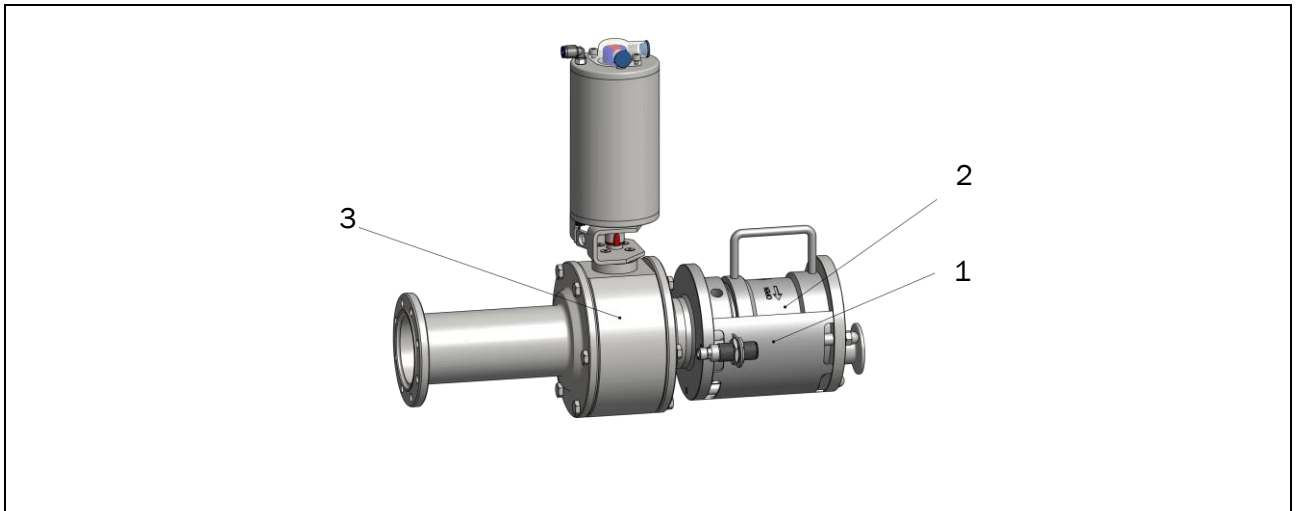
Overview of Plug-in Chamber with Ball Valve
